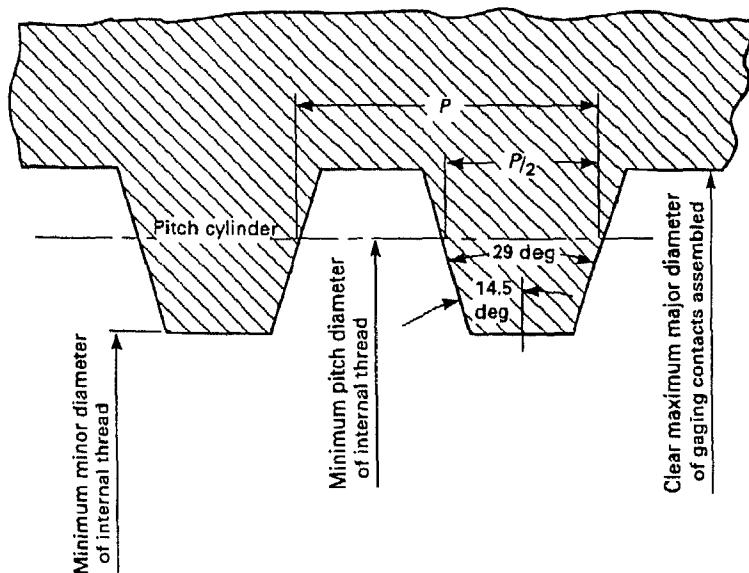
THREAD FORM OF SOLID THREAD SETTING RING GAGE FOR INTERNAL THREAD
